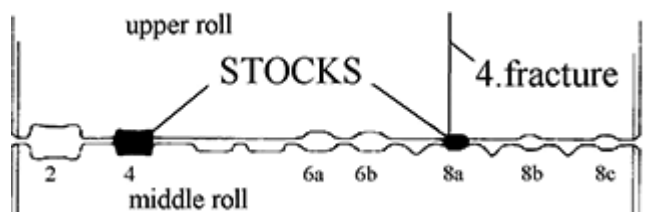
Fracture surfaces of the 4<sup>th</sup> broken roll and the position of the stocks at time of the fracture
